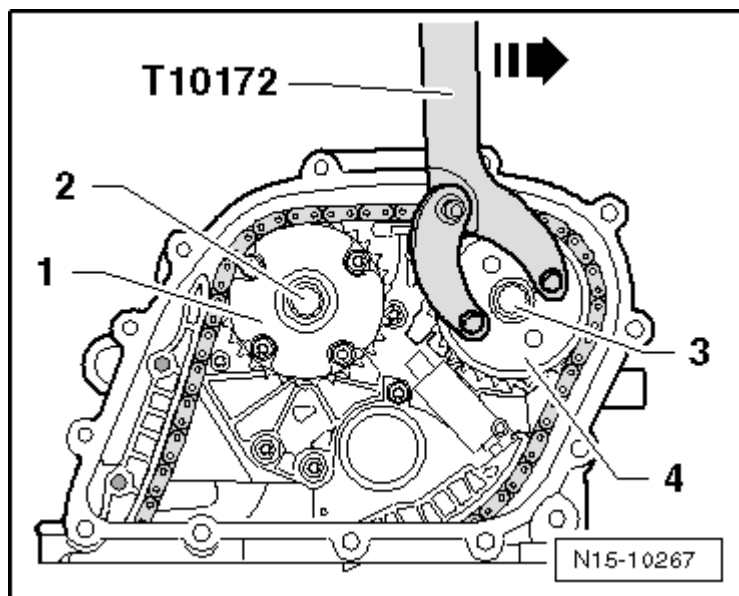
Attaching Modified Counterhold Tool Touareg V10 T10172 On To Chain Sprocket For Exhaust Camshaft
